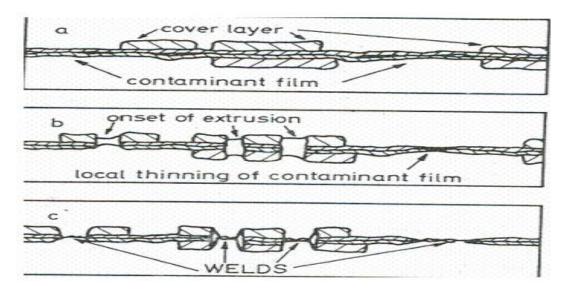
The bond formation mechanism in cold pressure welding
